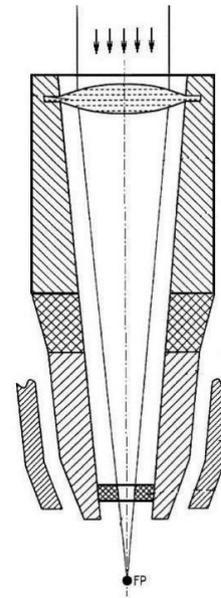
The design of an integrated plasma torch with a hollow cathode that allows laser radiation to be fed coaxially and perpendicular to the surface of the product being welded (Adapted from [54], Patent)
